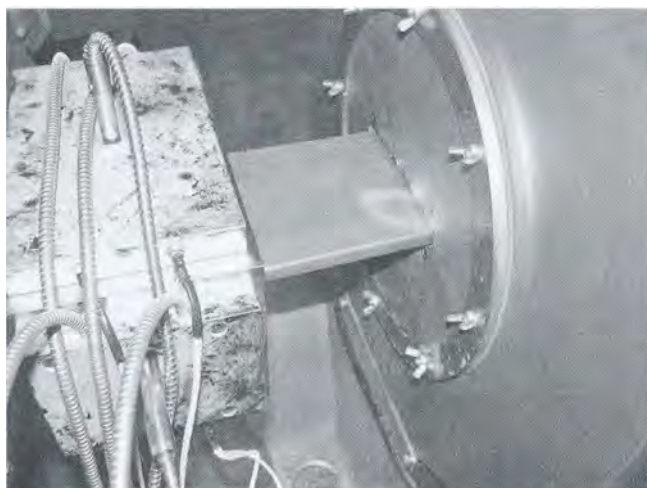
WPC exiting the extruder die (left) and entering cooling tank (right).
